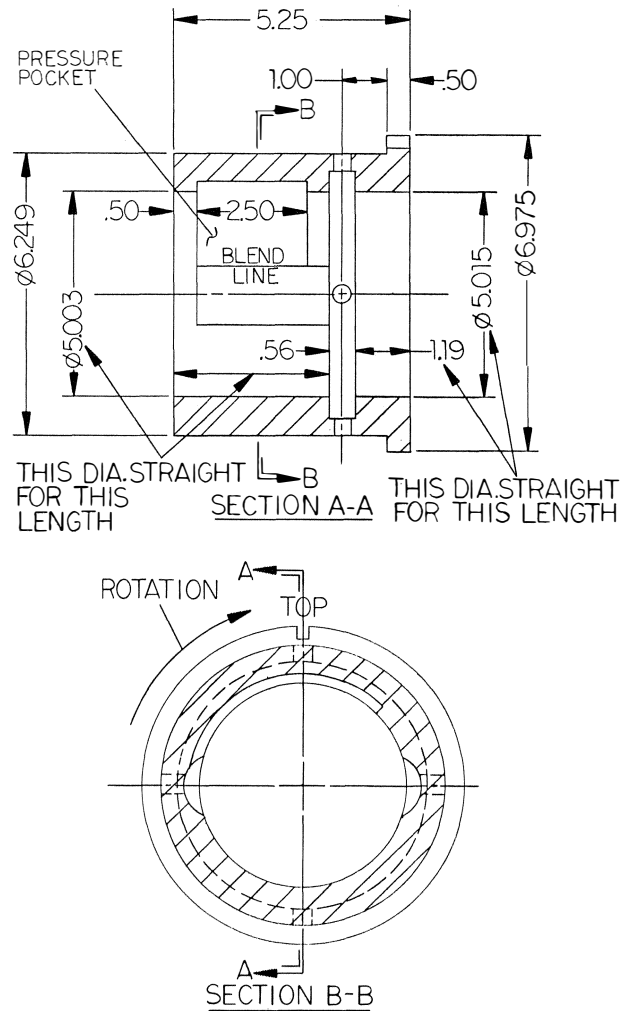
Redesigned Straight Bore Pressure-Dam Bearing.
